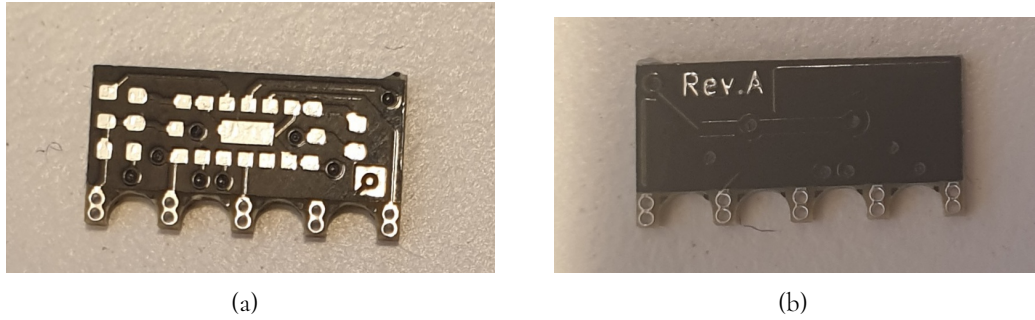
Prototype satellite PCB. (a) Front side. (b) Bottom side.
